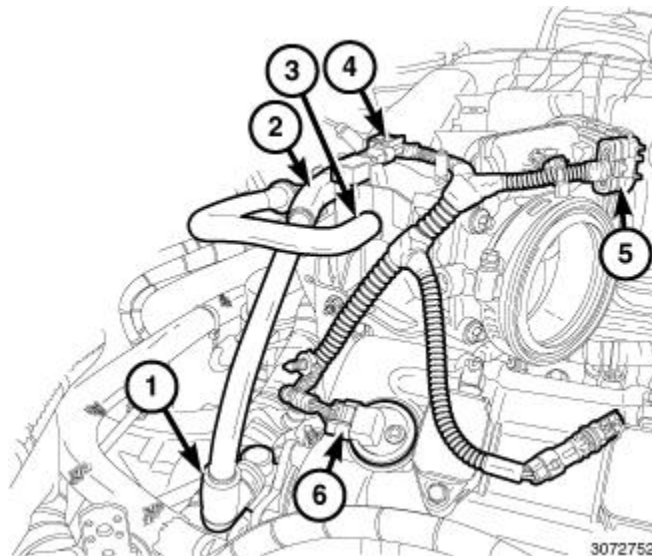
PCV Valve, Intake Manifold, Brake Booster Vacuum Hose, MAP Sensor, ETC & CMP Sensor Electrical Connectors
